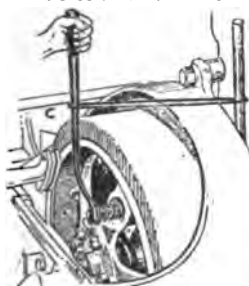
All operations on the clutch springs are made easy by the aid of the compressor shown. It consists of a forked lever, held by a steel wire to a rod braced on the engine support. The forked lever is also an effective tool for removing valves.
